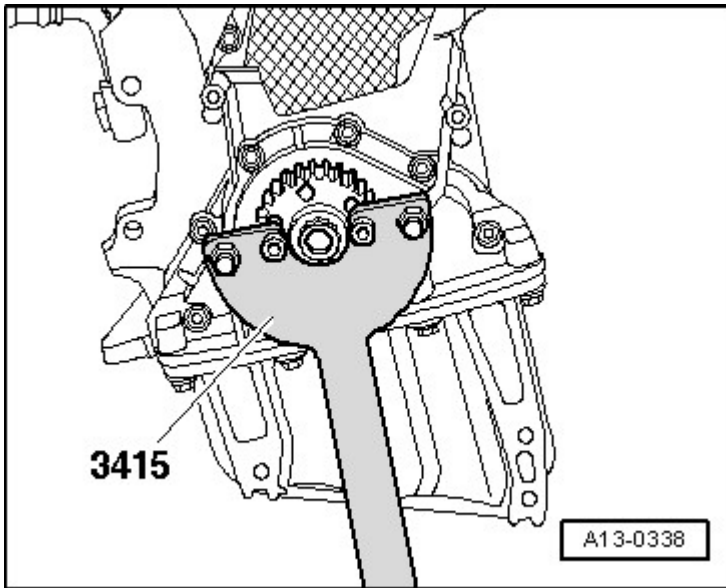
Crankshaft Toothed Belt Sprocket, Removing And Installing
